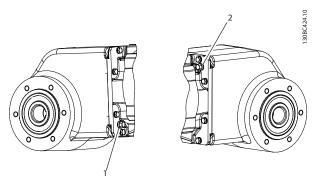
VLT OneGearDrive Oil Screws 1 and 2
